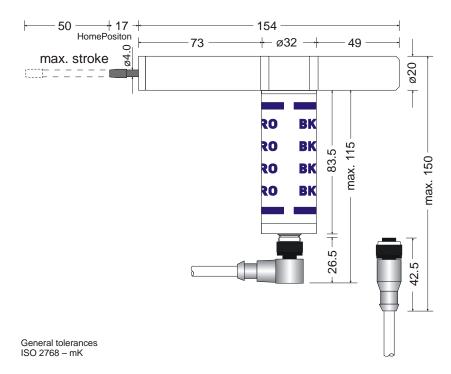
Mechanical Dimensions – Scanner TK9LIN50
